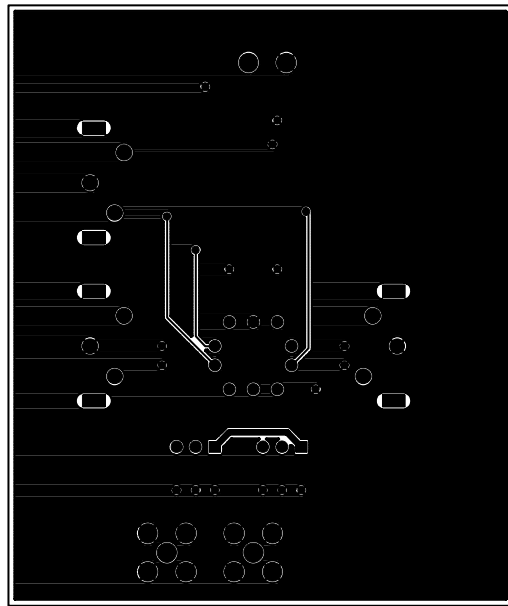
PCB Drawing Layer 2 (Bottom Layer of the [EVAL-ADG854EBZ](#) Evaluation Board)
